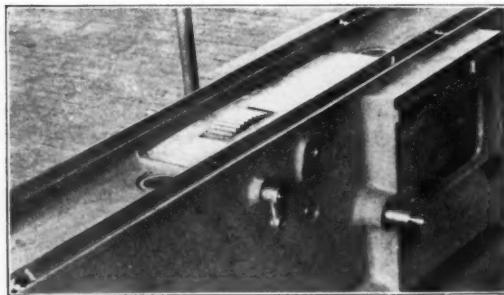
View of a planer showing certain of the essential lubricating features, viz.: (1) The cap for enclosing the pressure lubricated bearing; (2) (3) (5) The sight feed oil indicators; (4) The force feed lubricating oil pump.
